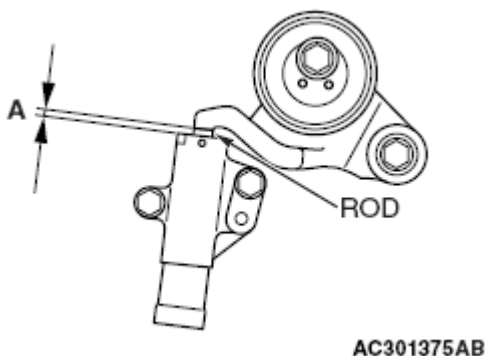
Identifying Projection Of Timing Belt Tensioner Adjuster Rod
